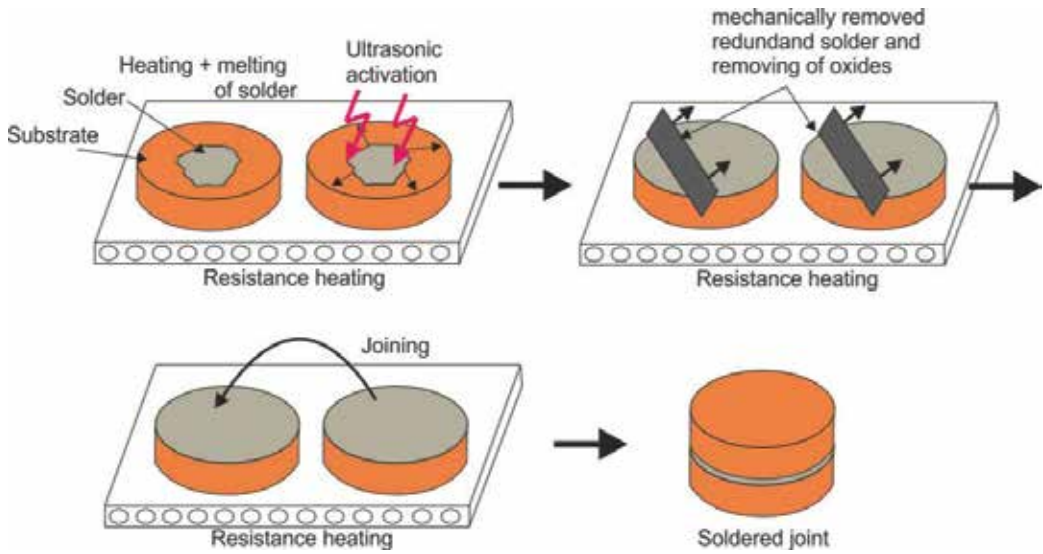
Procedure of joint fabrication by ultrasonic soldering.
